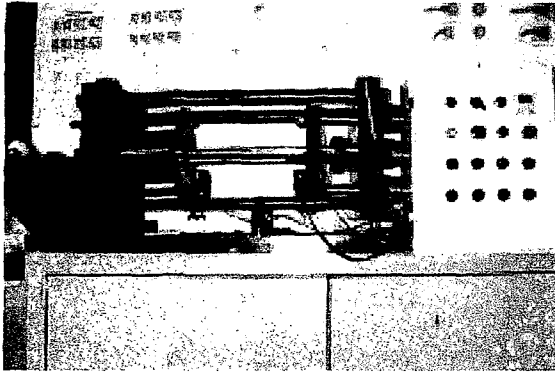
The hot metal extrusion bending machine of the curved metal tube.
